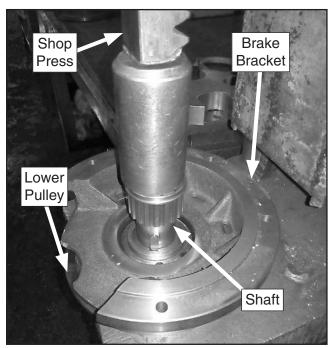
Using shop press to re-install shaft with bearing assembly into brake bracket and lower pulley.
